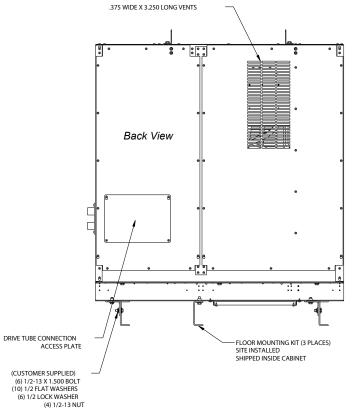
Drive cabinet dimensions: Frame 3 (dimensions shown in inches [mm])^(a)
